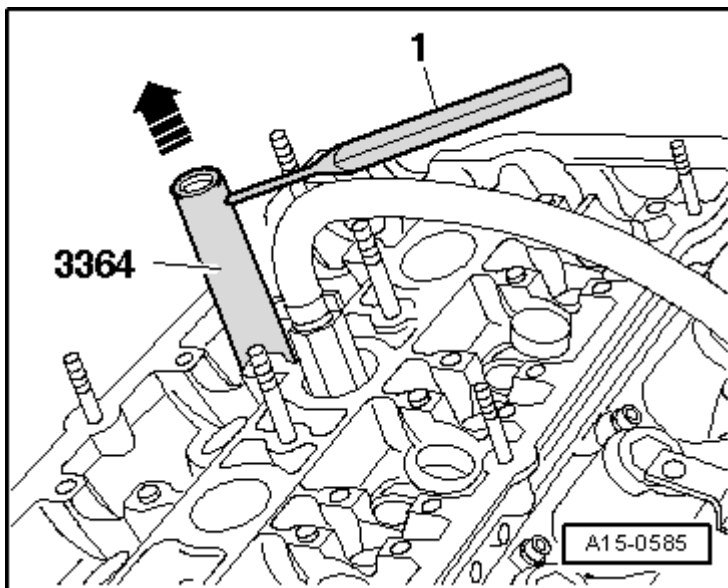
Identifying Placement Of Lower Part Of Valve Seal Removal Tool 3364 On To Valve Stem Oil Seal
